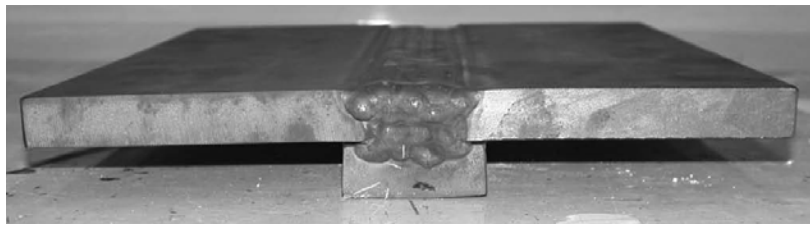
Wide-gap weld in alloy 230 plate after stress relief and straightening.
